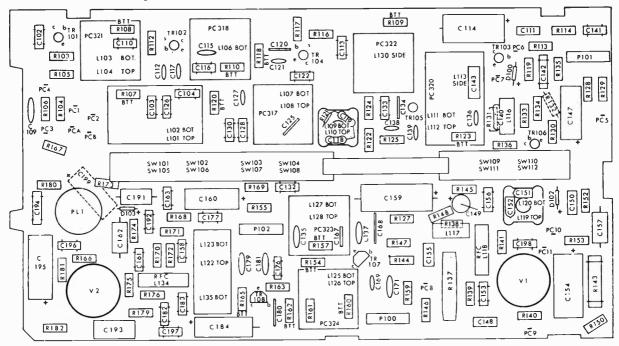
Layout of the i.f. printed panel, viewed from the component side.
